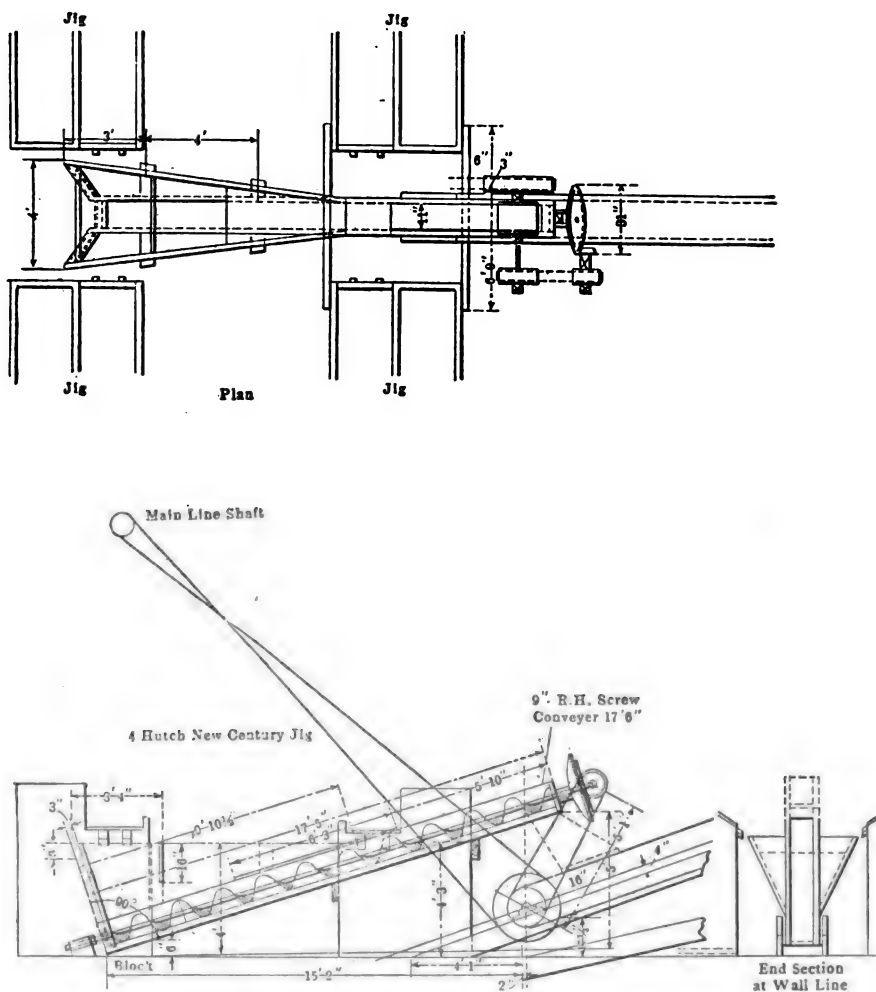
METHOD OF SETTING UP SCREW CONVEYOR AS DEWATERER.
